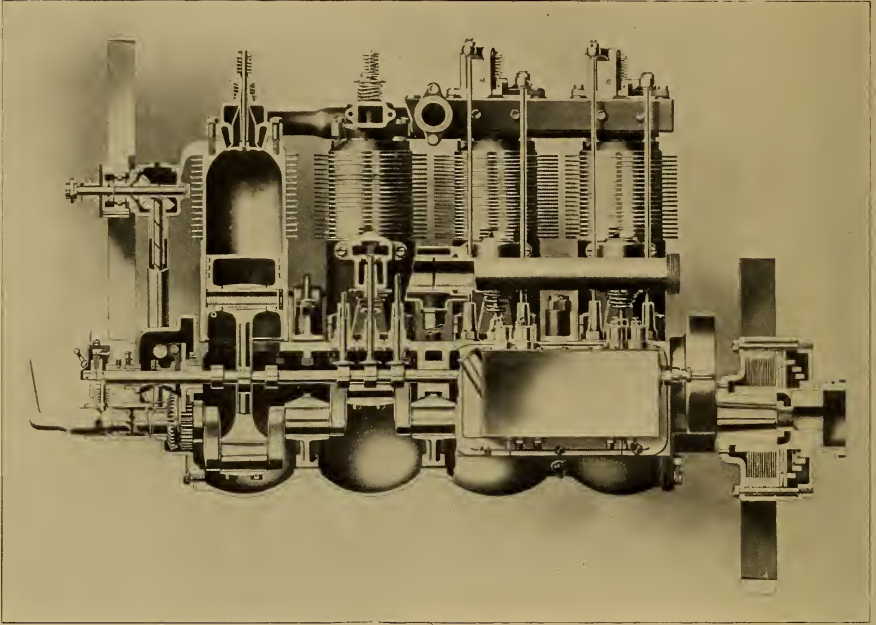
FOUR-CYLINDER AIR-COOLED MOTOR, PARTLY IN SECTION. CONCENTRIC INLET AND EXHAUST VALVES IN CYLINDER HEAD. H. H. FRANKLIN MFG. CO.
